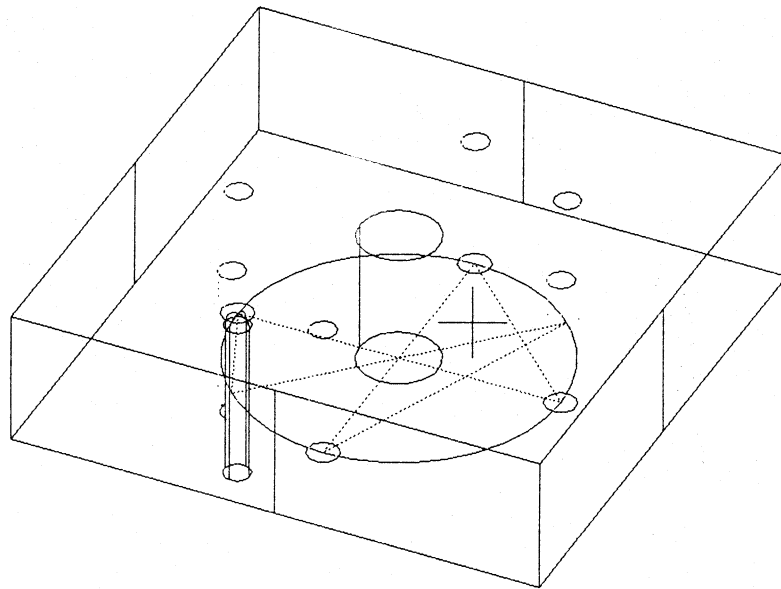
The generated tool path of the die holder for the final deep drawing process (drilling and reaming using a Machining Center).
